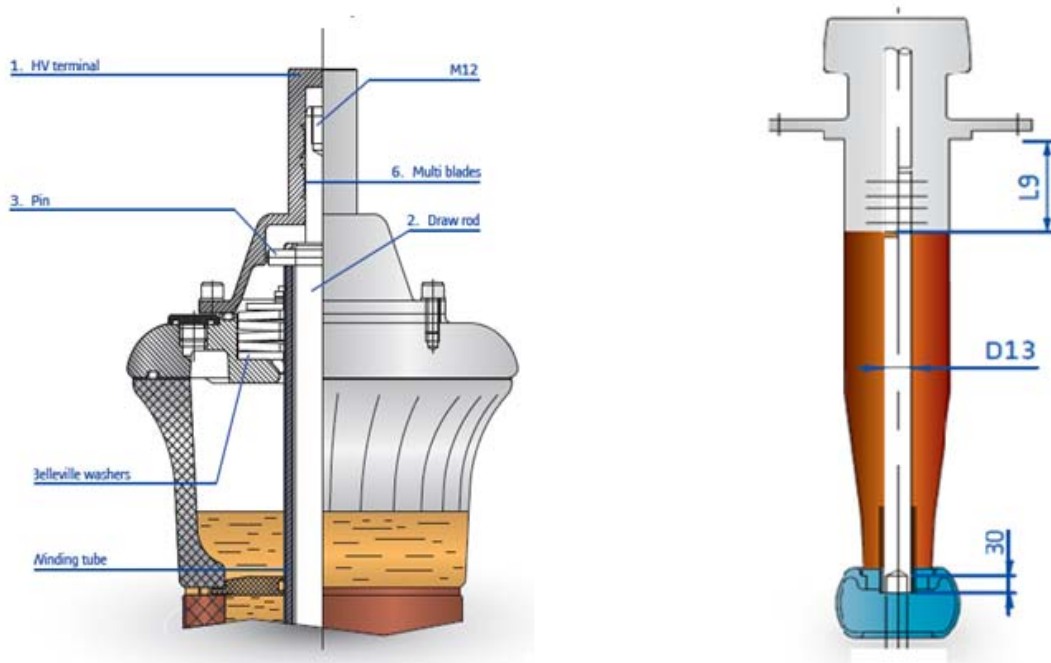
Head and Tail of a Draw Rod Connection Bushing (of a PSO 52 ÷ 170 kV).
